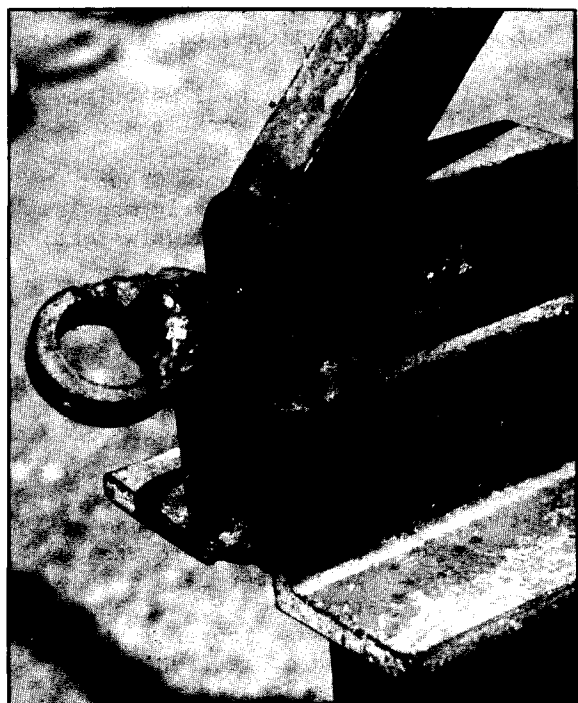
Eye-bolt tapping into frame of early Anglebar. When this broke, the whole frame had to be taken for welding.
